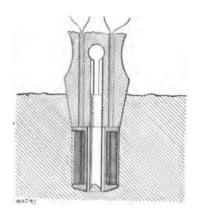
Section through Plug and Specimen, Dr. Drysdale's Test
